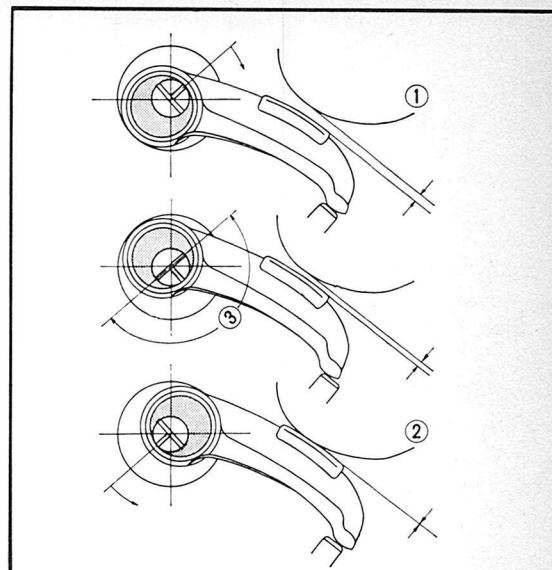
The eccentric adjustment also moves the contact point on the valve stem as shown in this drawing. At 1, valve clearance is maximum; at 2 it is minimum. The range of adjustment of the eccentric is 180 degrees, shown at 3. Clearance is set by measuring the gap between the pad on the cam follower and the cam.
